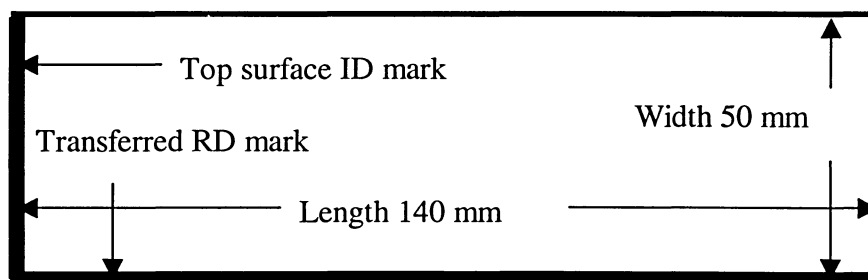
Schematic diagram of peel test coupon for 2.0 mm thick sheet
